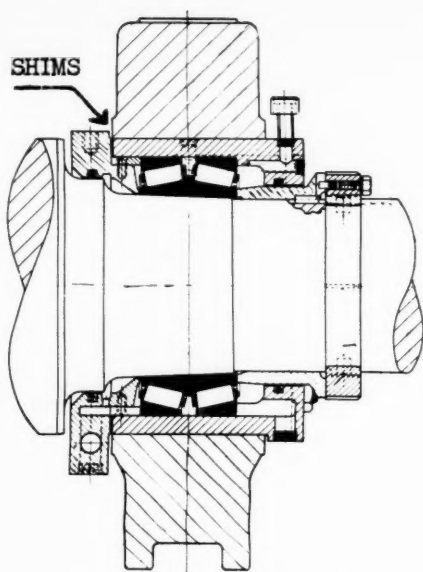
Cross-Section of Roller Bearing Mounting: Position for Shims under Outer Retaining Ring Shown
